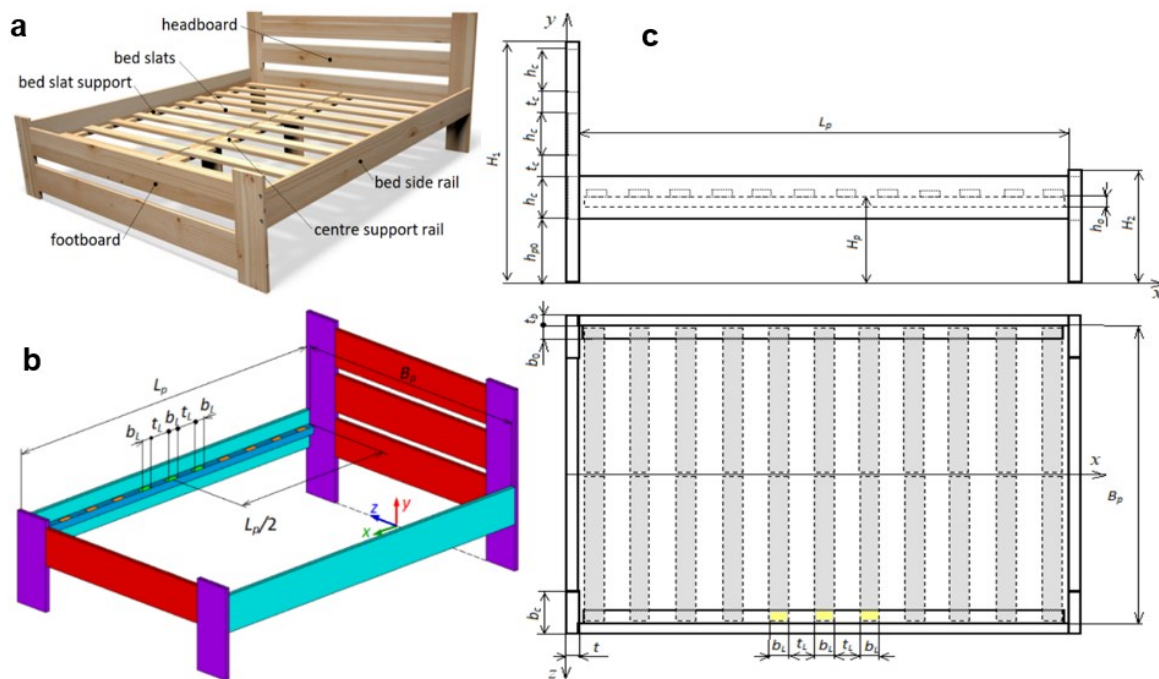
Typical single-bed design: a – overall view; b – FEM model; c – dimensioned technical drawing
